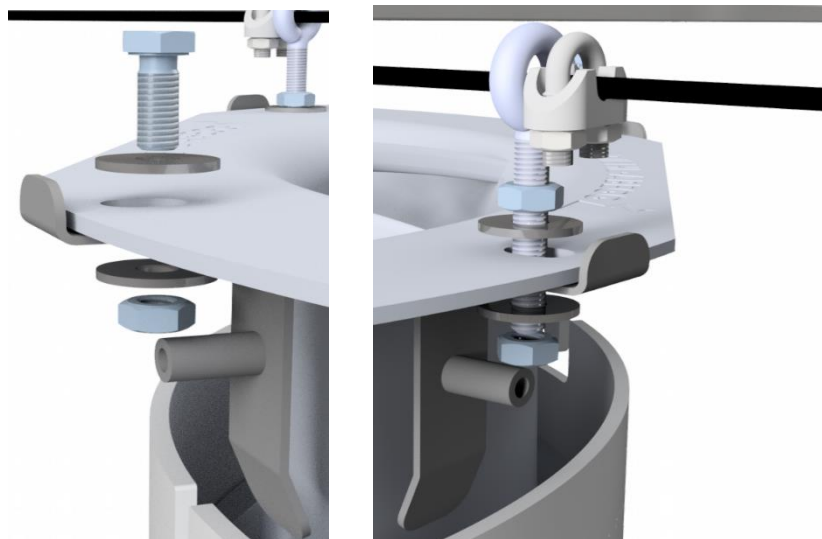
Installing the mounting brackets + spacers to the fan by means of bolts (left) and eye bolts (right)
